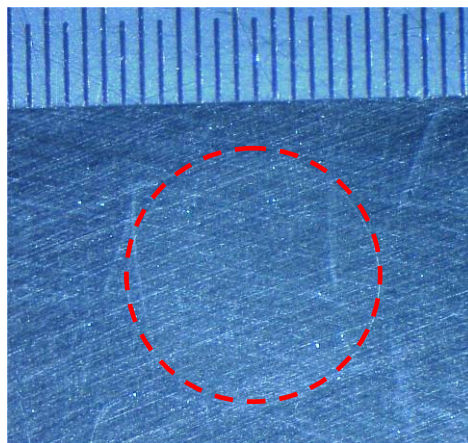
Polished surface used for rivet measurement with rivet diameter highlighted in red
